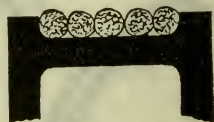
Early junk packing. This packing could neither be examined nor renewed without removing the piston from the cylinder. *To Remedy this*, the groove was made without a flange at the end farthest from the crank, and a false flange called a *junk ring* was bolted to the piston to retain the junk in place and admit of its being removed without taking out the piston. The term "junk ring" is still in use although junk is no longer used to pack pistons; a better term is *follower ring*.
